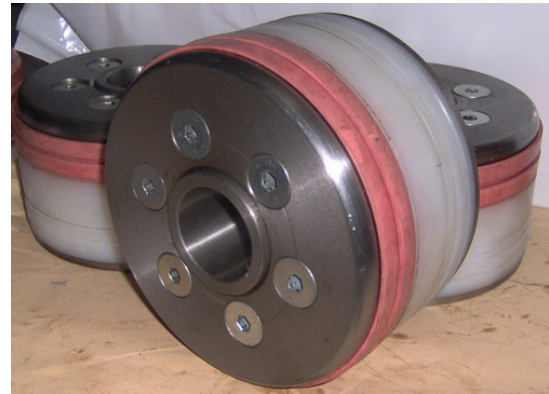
The new CAMIRO High-pressure piston with variable profile for balancing wear surface for drilling pump 3PN 1600.
